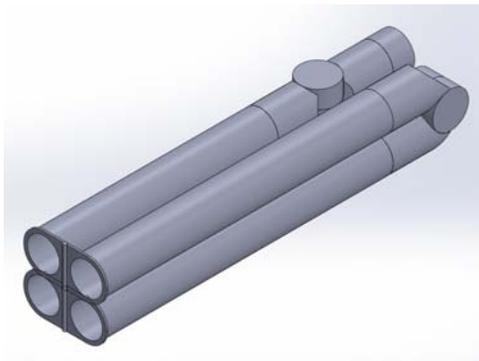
Folding 7DOF manipulator concept for SNC Dream Chaser (stowed)
